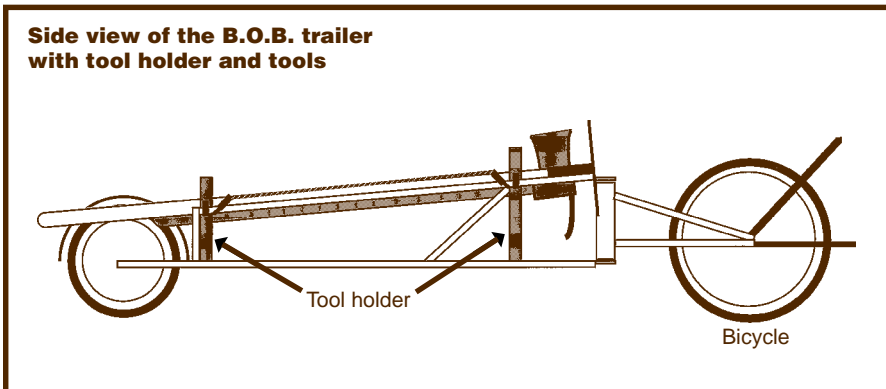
Kurt Loheit's tool holder for the B.O.B. Yak trailer is made of $\frac{5}{8}$ -inch (16-mm) polyethylene. See Appendix B for construction plans.
